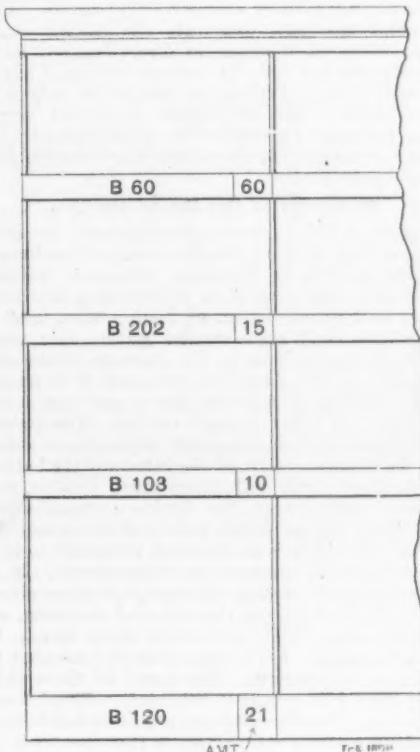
Front of Bin Used for Storing Small Castings by the R. K. Le Blond Machine Tool Company, Cincinnati.
